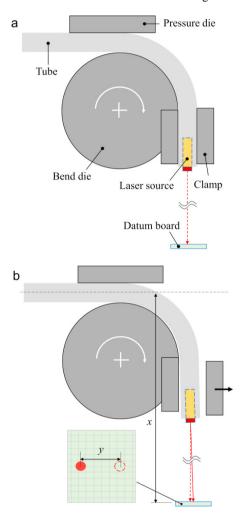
Schematic of the laser measurement: (a) Loading; (b) Unloading
